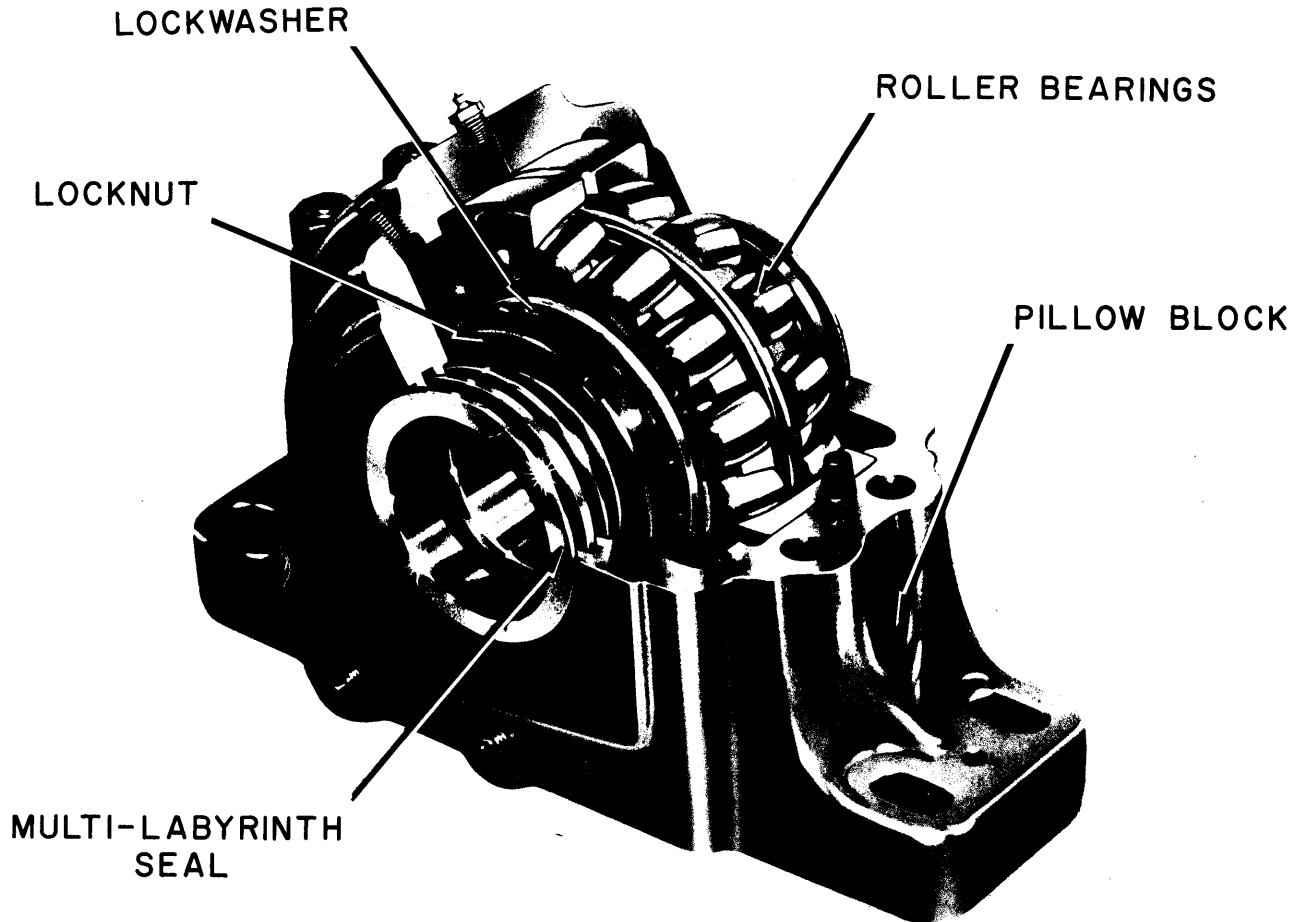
Roller Bearing Pillow Block, Cutaway View
